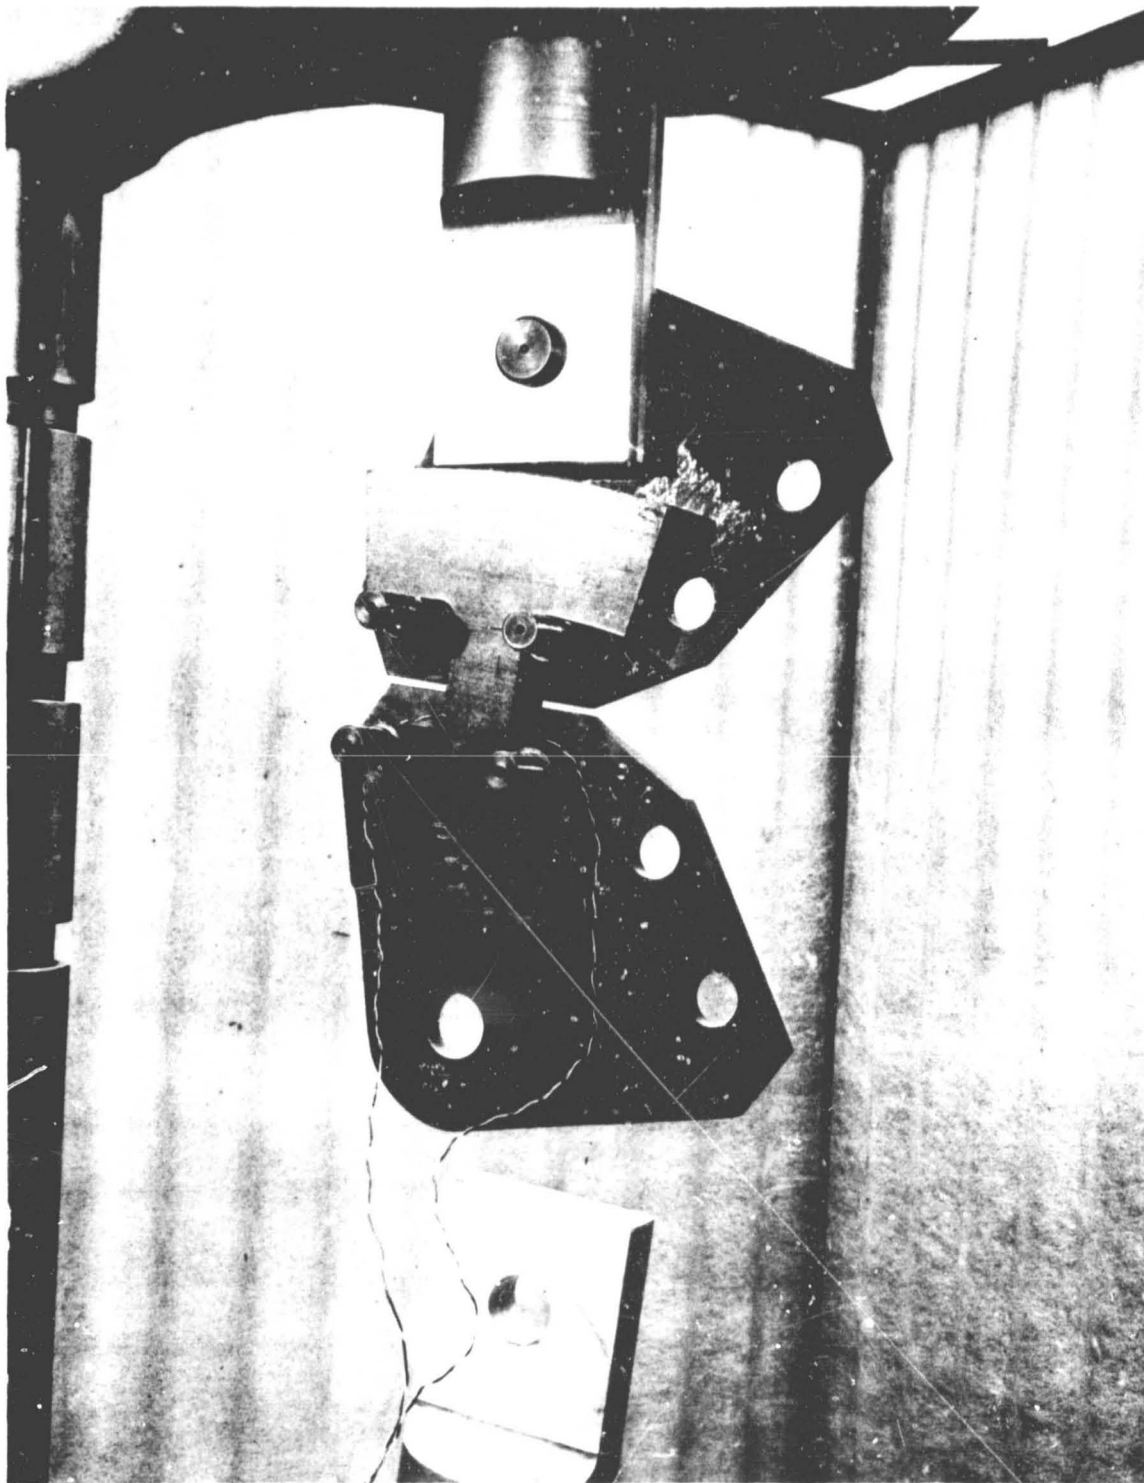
Strut-to-Ring Test Specimen in Fixture.
